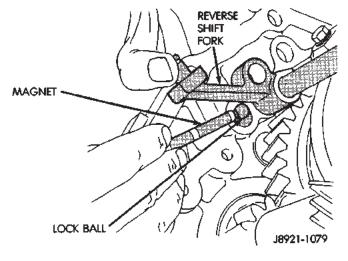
Install Fifth Gear Shift Rail Lock Ball
